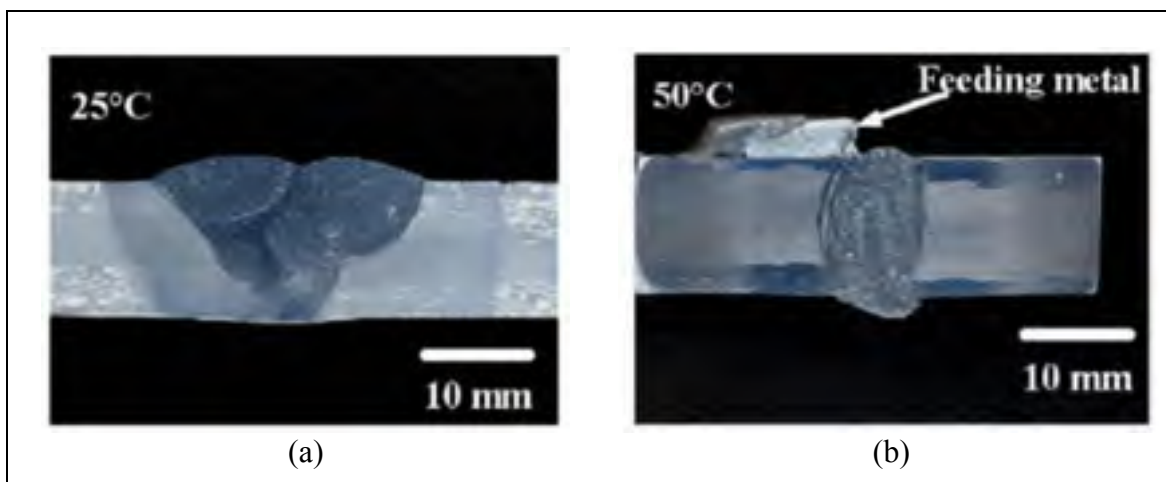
Cross-section of (a) direct electric arc welding; (b) indirect electric arc welding
